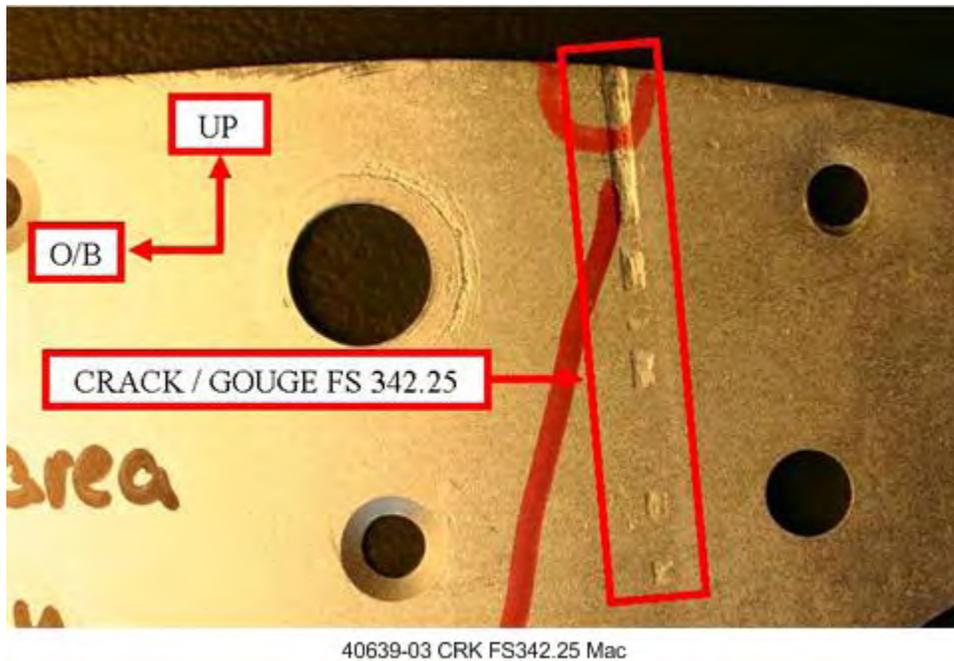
Macroscopic View of Crack and Gouge on the Bulkhead Assembly FS 342.25
